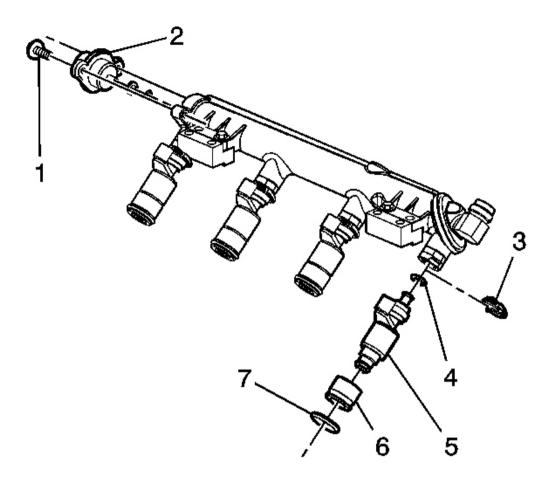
View Of Fuel Rail Assembly Courtesy of GENERAL MOTORS CORP.
